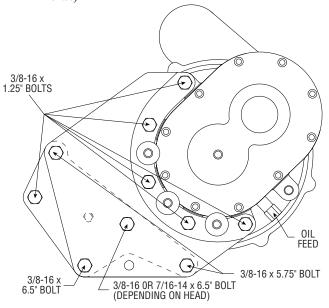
d / Driver side supercharger mount. (69 Mustang)
